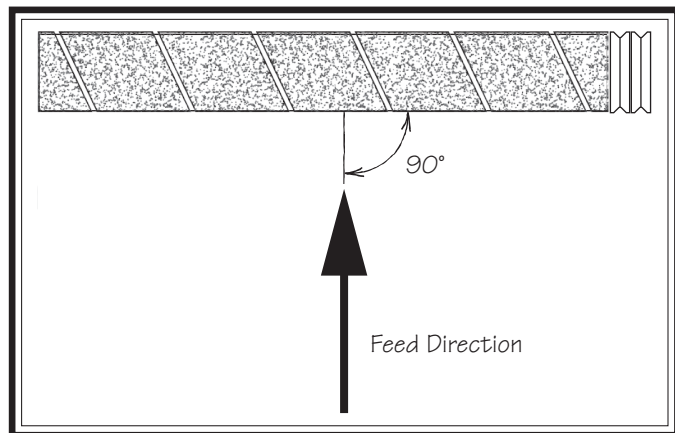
Feed direction perpendicular to sanding drum (viewed from top of machine).
